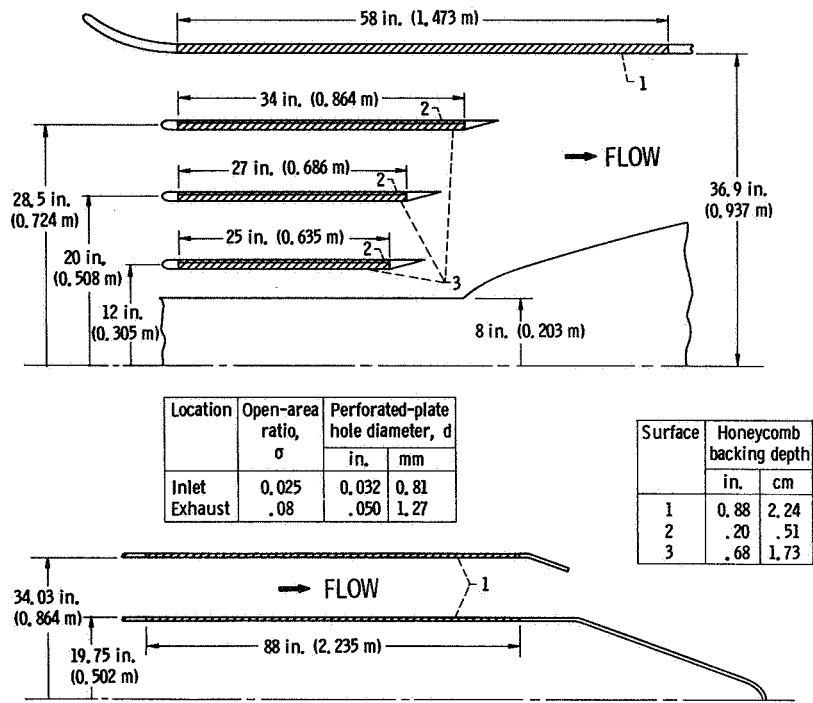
Suppressor dimensions and materials. All perforated-plate sheet, 0.02-inch-(0.51-mm-) thick aluminum; all honeycomb, 3/8 inch (0.95 cm) hexagonal.
